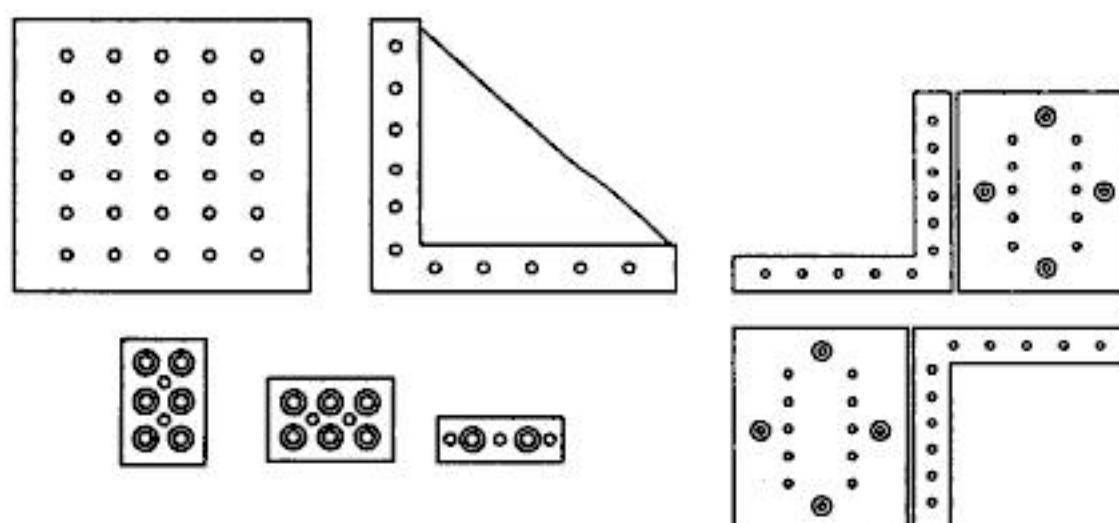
Modular fixture elements used for supporting complex workpieces
